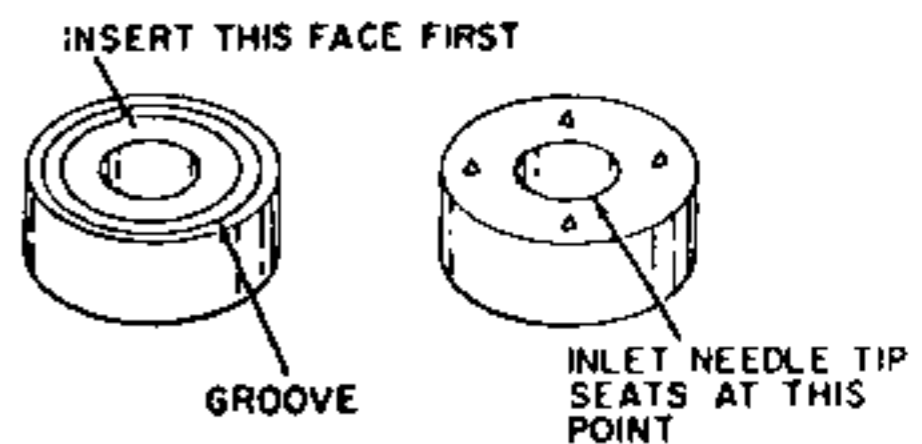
The Viton inlet fuel valve seat must be installed grooved side first.
